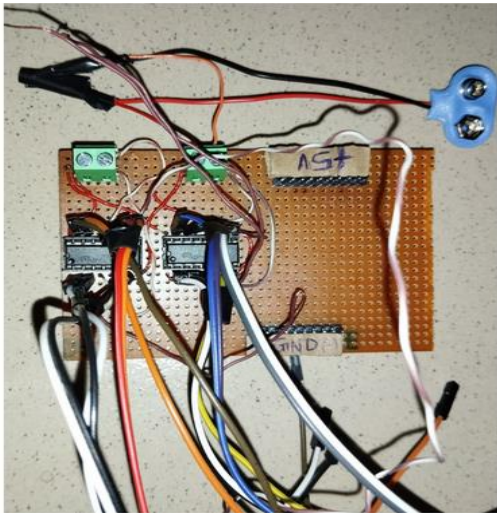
Image of the soldered L293D motor ICs on a veroboard.
